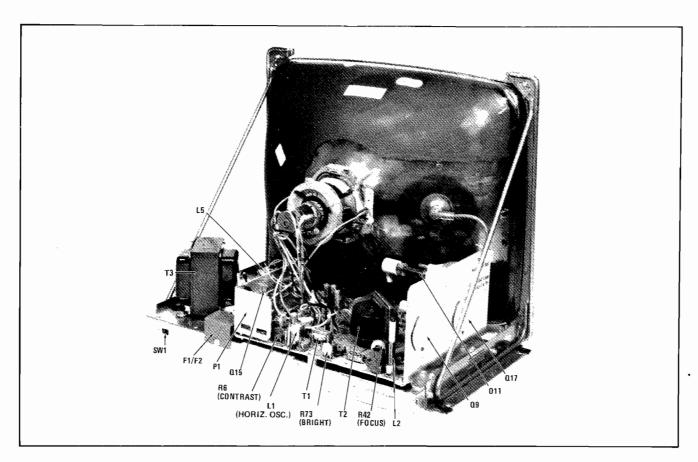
Motorola Monitor Chassis Rear View —Component Location
